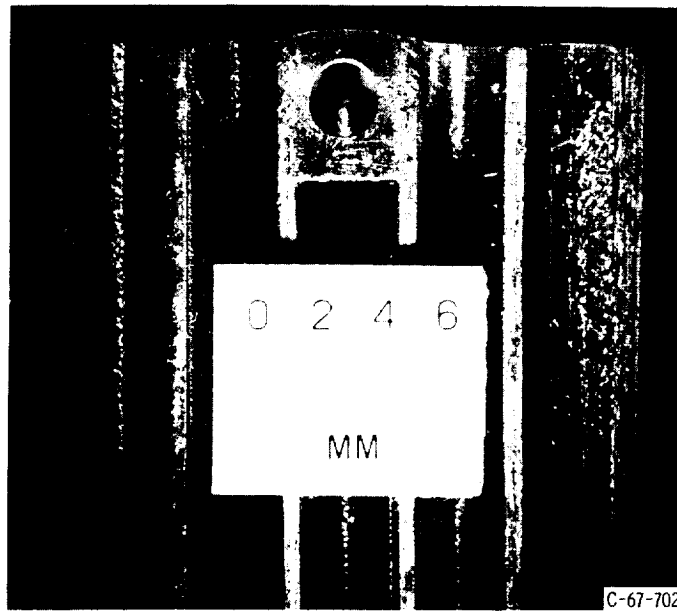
Honeycomb fuel stage showing elongated tab hole after axial support test.
